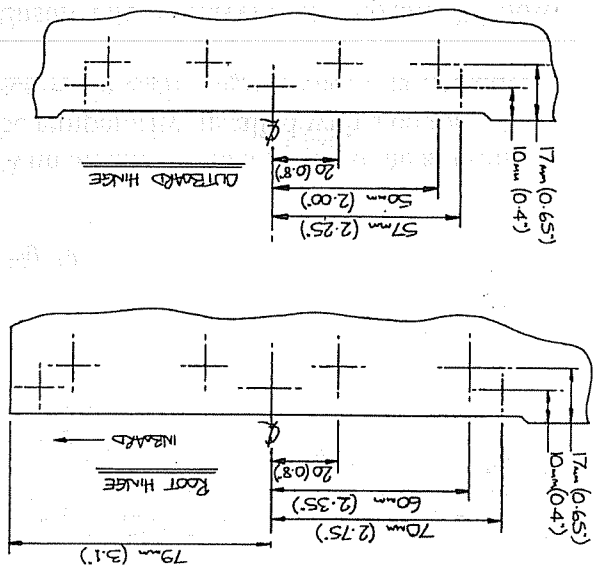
Rivet hole centres in flange (aileron L.E. not shown)
